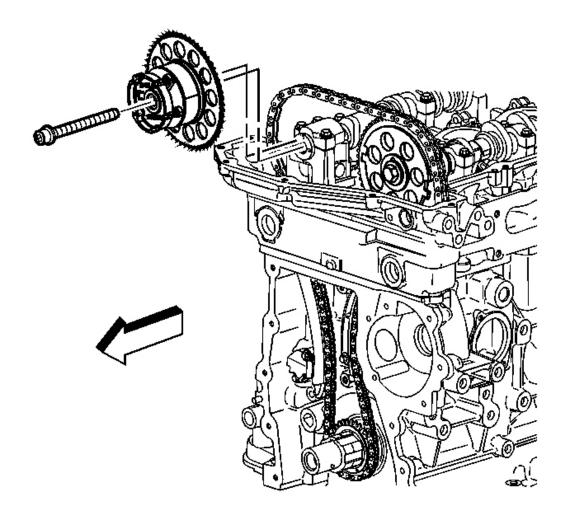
Identifying Exhaust Camshaft Position Actuator Courtesy of GENERAL MOTORS CORP.
